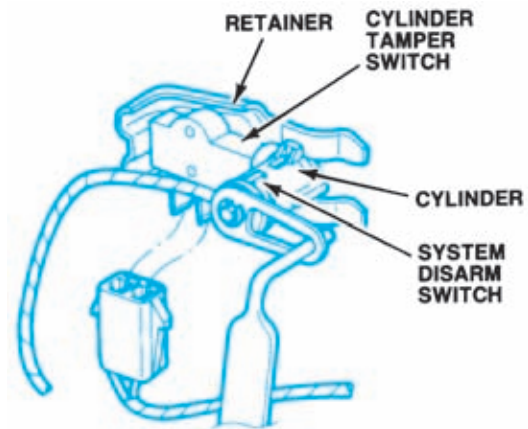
The UTD disarm switch is part of the LH door lock cylinder. (GM Service and Parts Operations)
